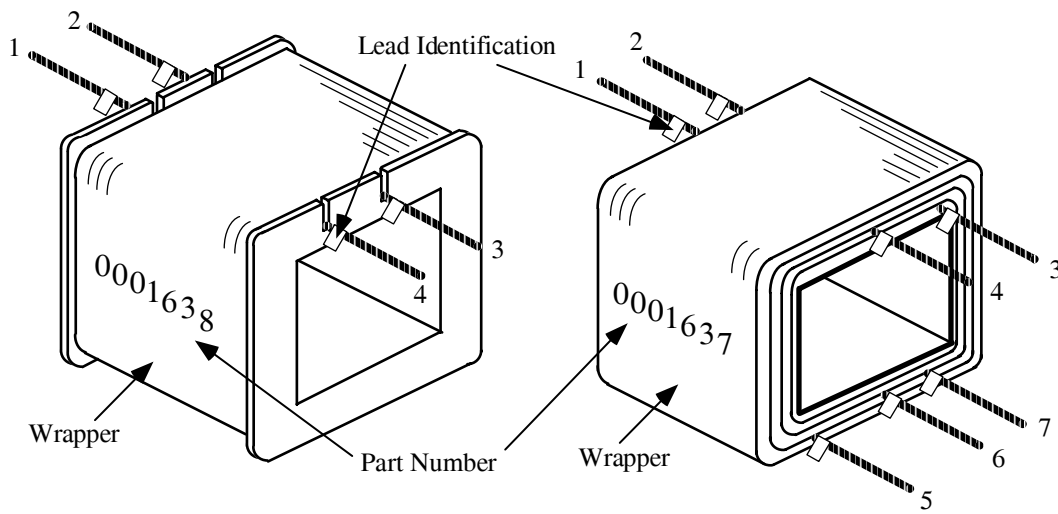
Finished Bobbin and Layer Coils, showing Lead Breakout.
